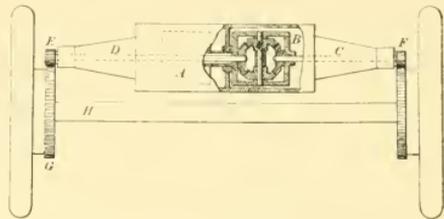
SINGLE MOTOR EQUIPMENTS.
